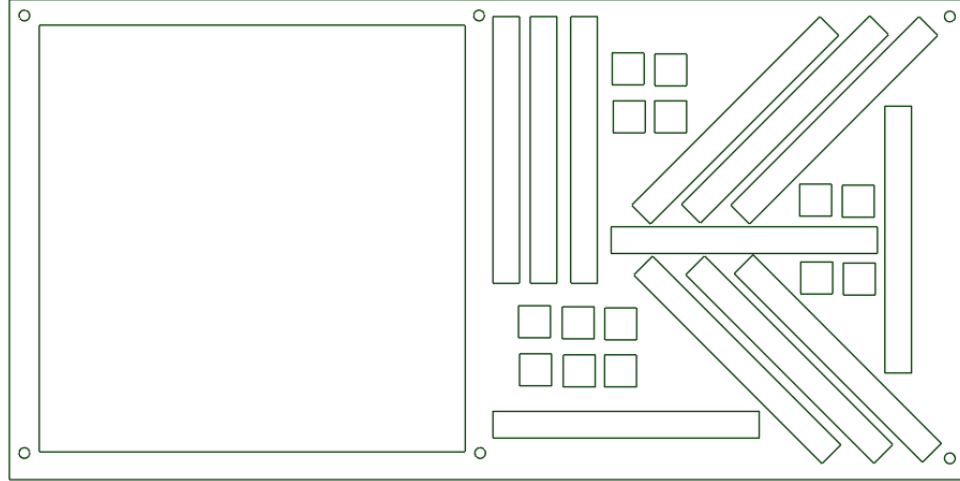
CAD drawing of a carbon-epoxy panel for CNC cutting.
